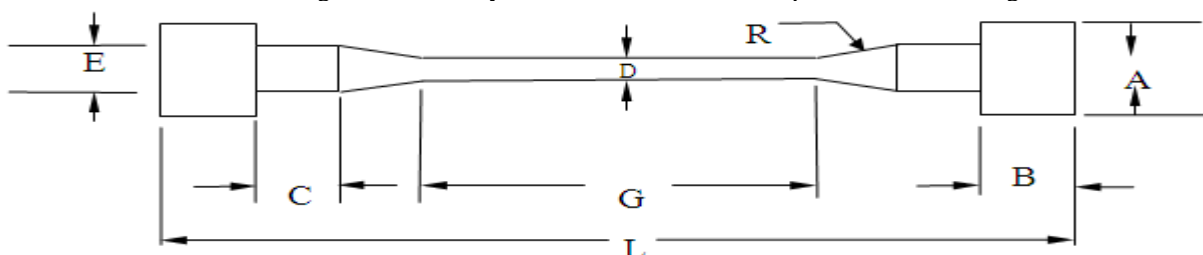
A schematic of the cylindrical test sample used for tensile testing.
